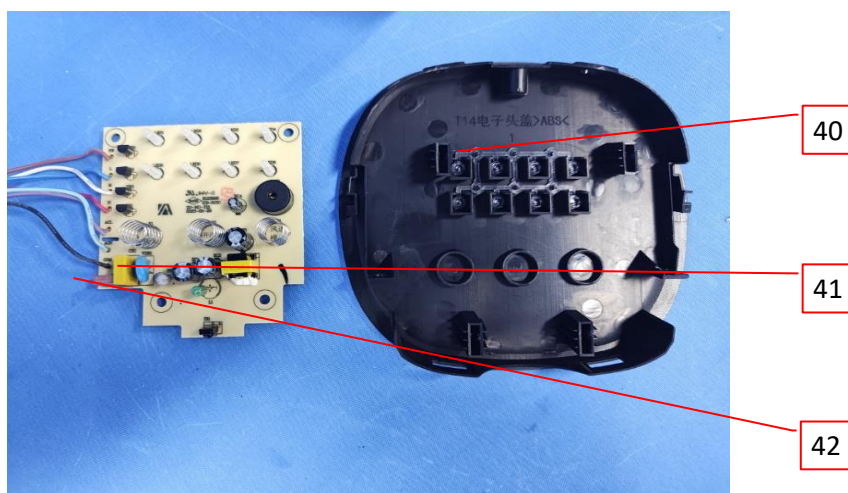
PCB view for NDTFT21R and NDTFT21RH
